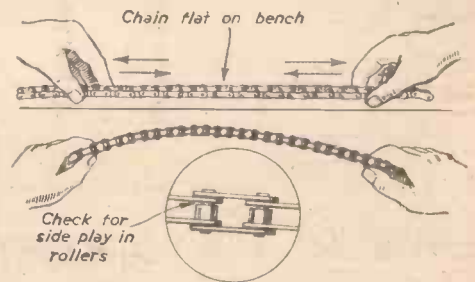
Testing chain for stretch, rivet and roller wear.
